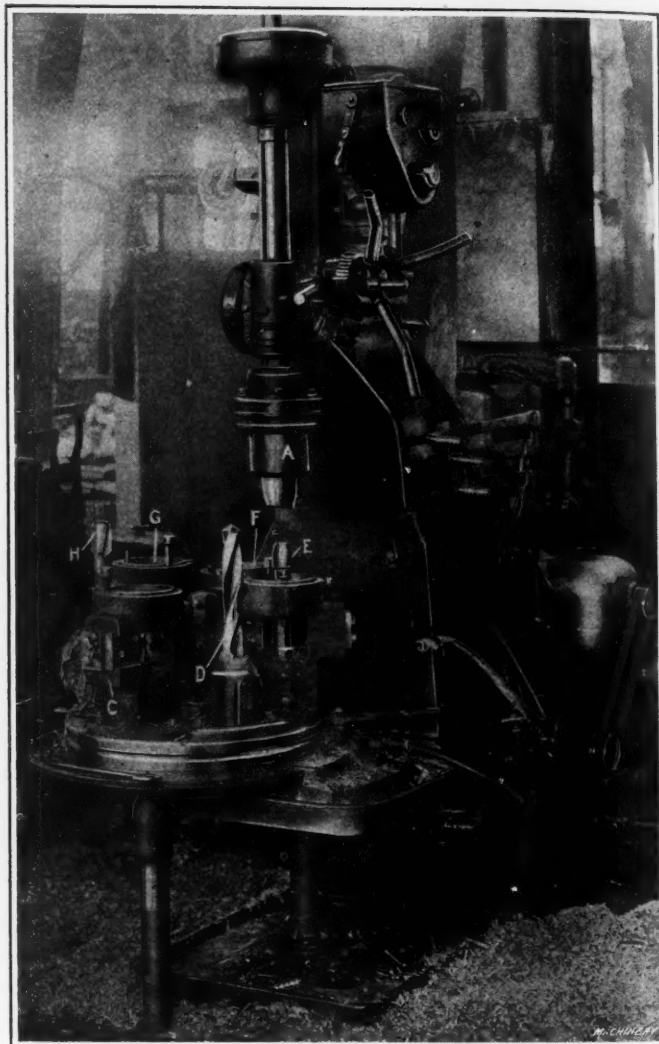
Drilling Machine built by Barnes Drill Co. for machining 18-pound High-explosive Shells
